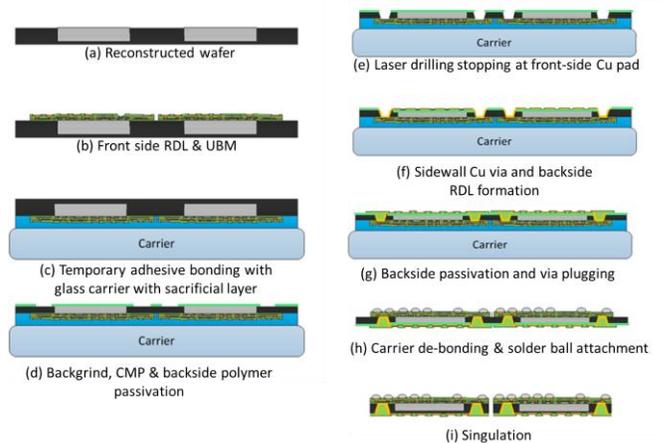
Process Integration flow of Mold-First FOWLP with double side RDL with laser drilled TMVs for PoP
